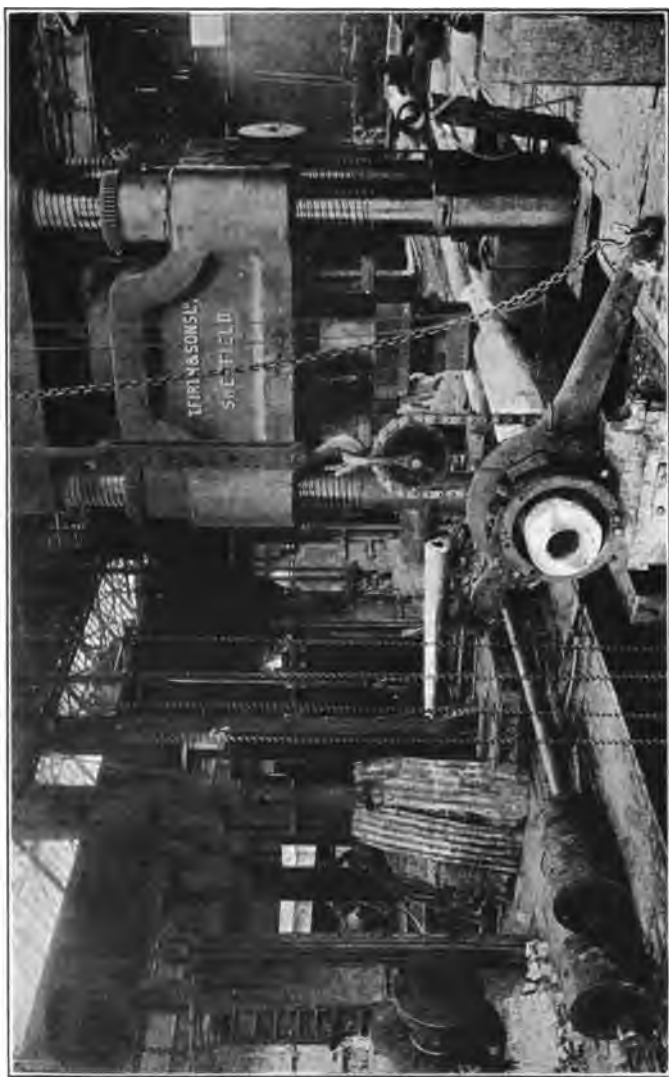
3,000-Ton Hydraulic Press with Work in Position.
